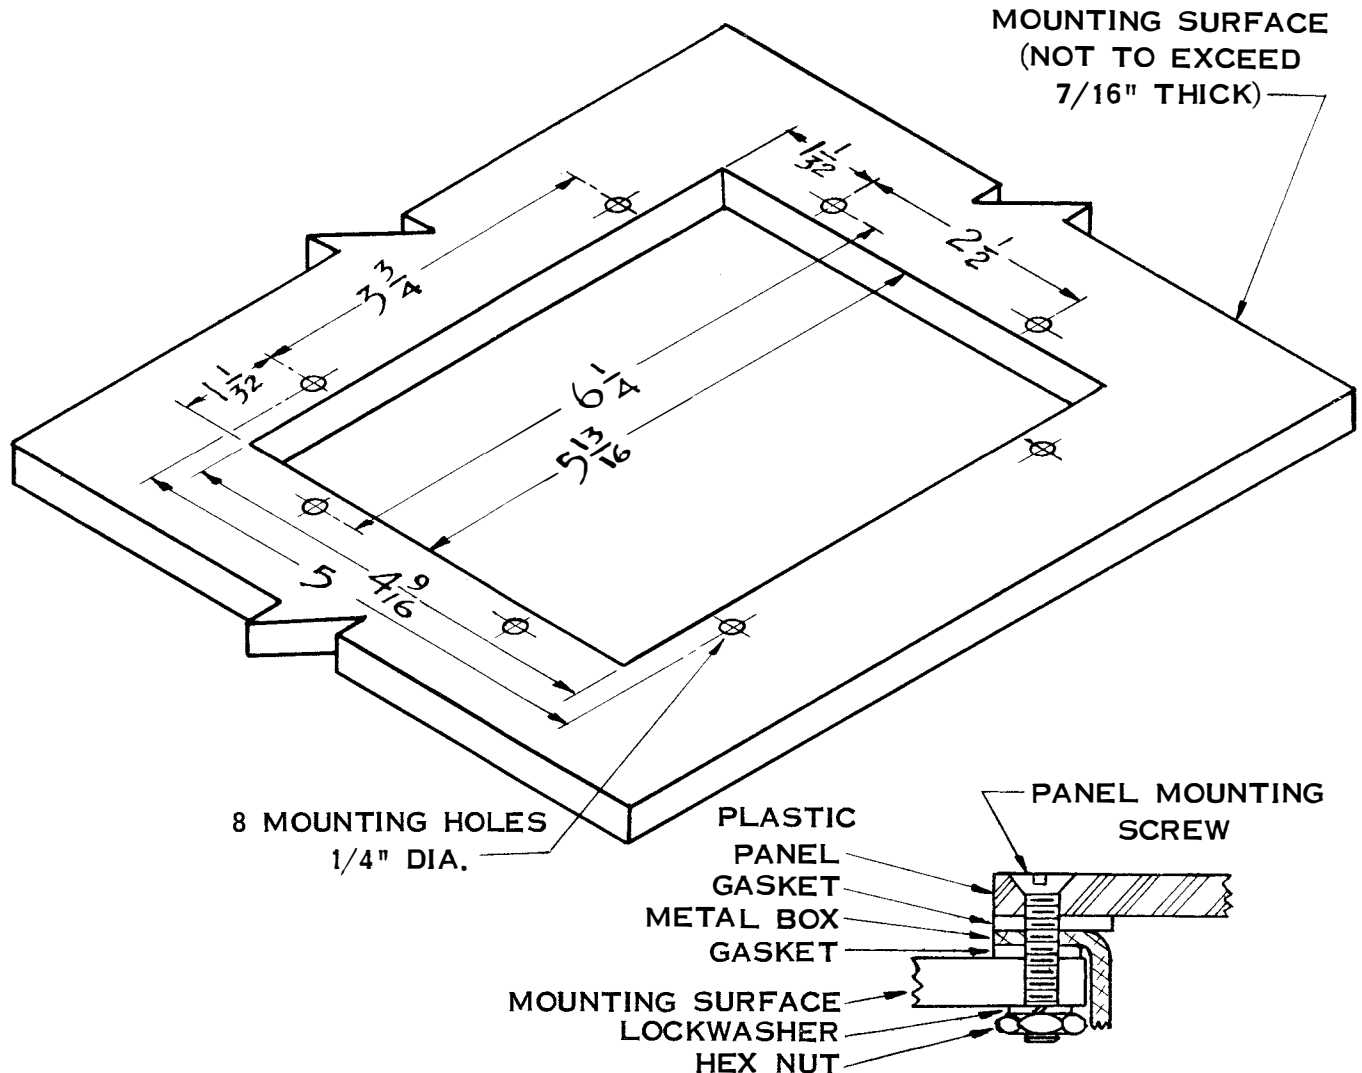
Control Panel Telegraph Key SB-315B/U, Mounting Details
